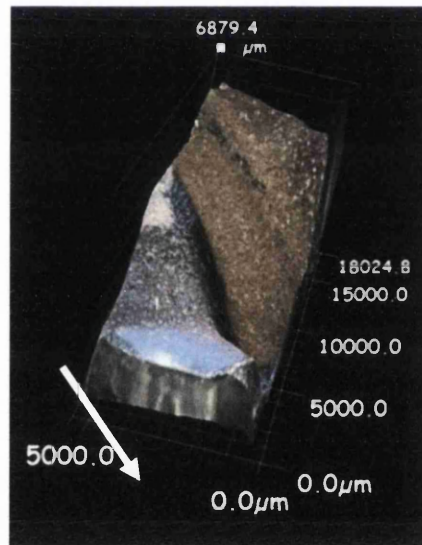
A 3D image of fracture surface of a failed U720Li fatigue specimen that underwent baseline fatigue testing at 750MPa and 600°C. The white arrow shows the kidney shaped plastic zone.
